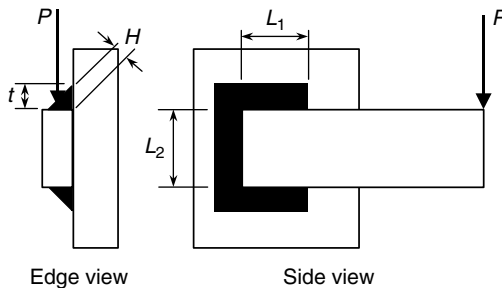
Fillet welds in shear and torsion.
